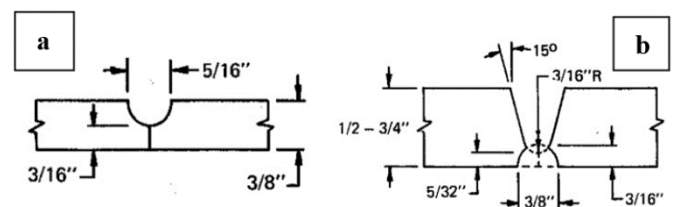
Experimental welding joint sample: (a) single U joint; (b) double U joint
